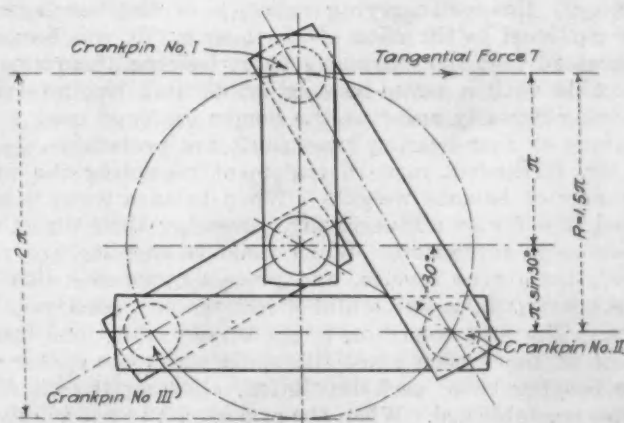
PART OF CRANKSHAFT SHOWING MAXIMUM LEVERAGE IN CASE OF THREE AND FOUR-BEARING SIX-THROW CRANKSHAFTS
